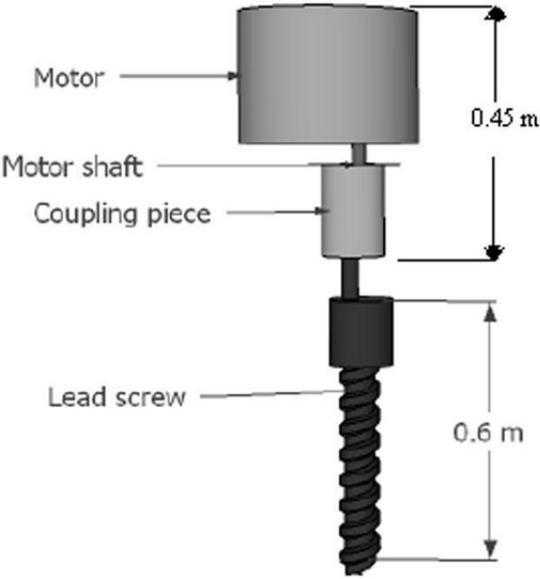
coupling piece connecting the gear motor to the leas screw.
